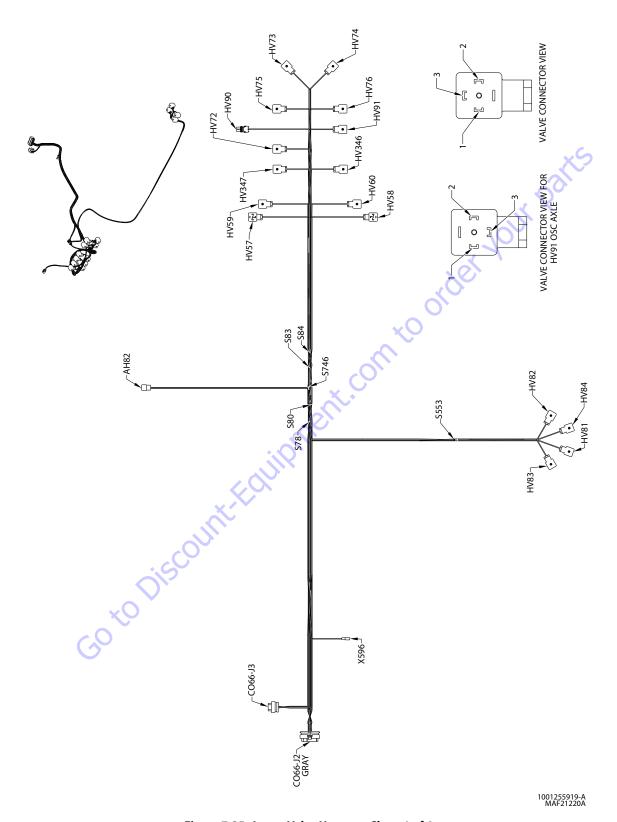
Lower Valve Harness - Sheet 1 of 4
